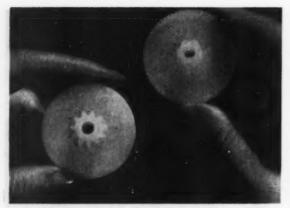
Molded nylon gear assembly contributes to Brownie's lower cost
